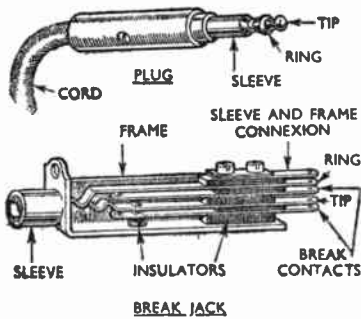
Details of a plug and jack, showing how tip, ring and sleeve of the plug form three concentric contacts.
